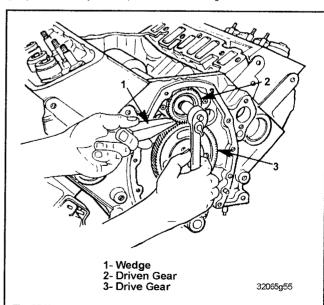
Use a wooden wedge to keep the balance and camshafts from rotating while loosening the retaining bolt
